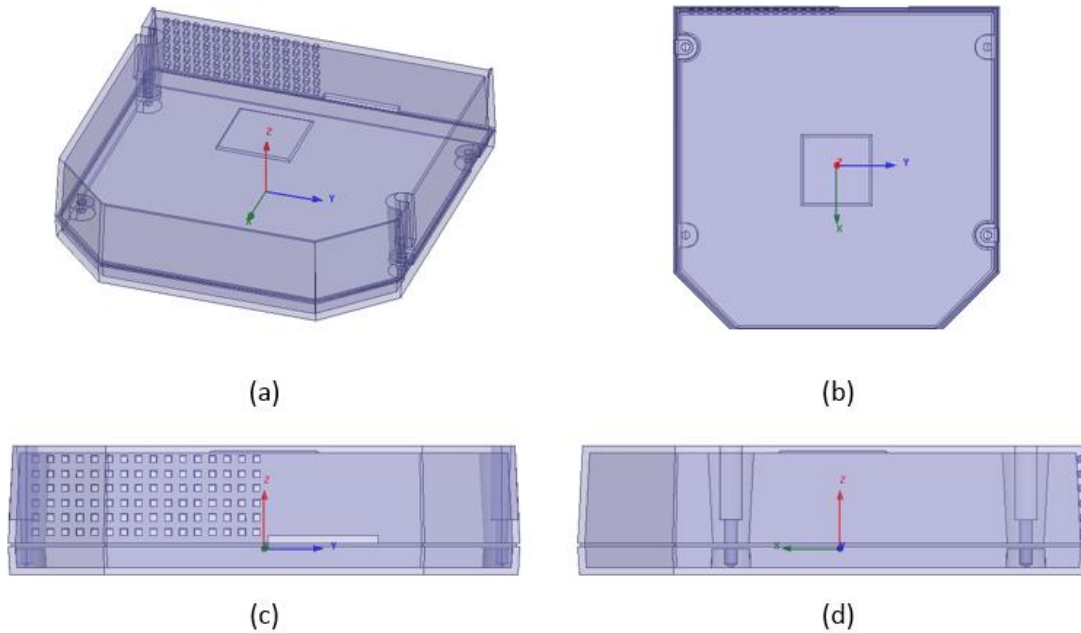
First version of the box prototype: (a) trimetric view, (b) top view, (c) front view and (d) side view.
